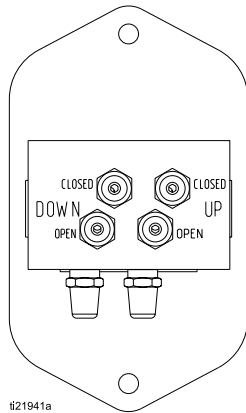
Tubing Connections at Solenoid Manifold, to Pump Inlet Manifold
